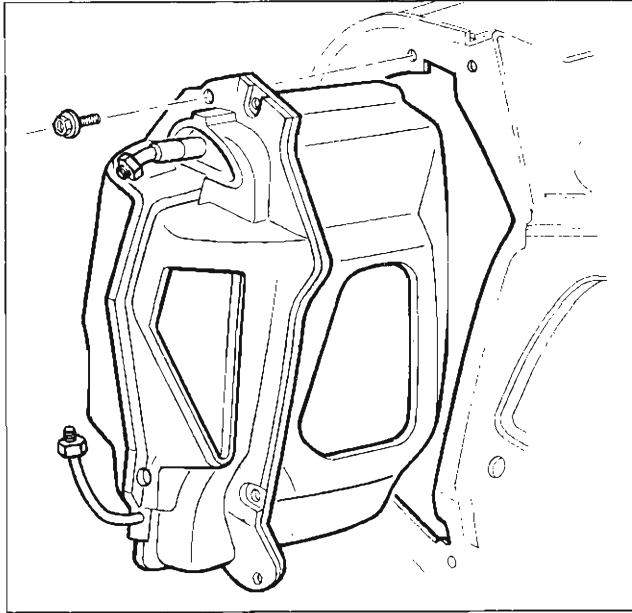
Evaporator Removal—Four-Season System Chevelle
